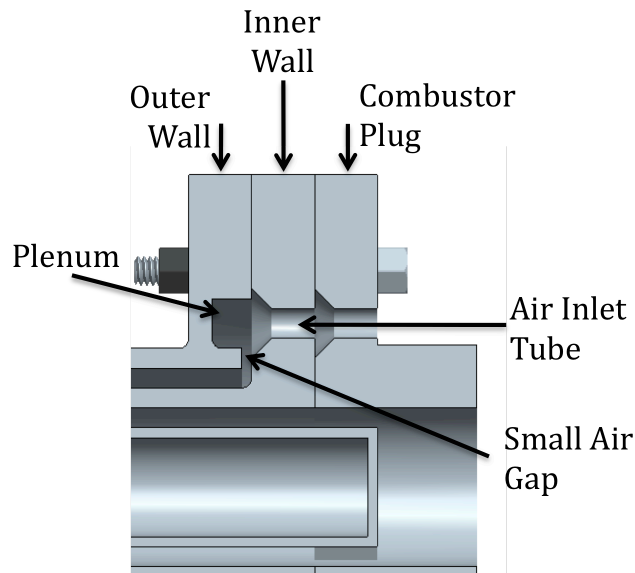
Cut-away view of the outer and inner wall pieces and combustor plug assembled together. Air inlet chamber (plenum) and the small 1 mm air gap that provides back-pressure for the chamber are shown
